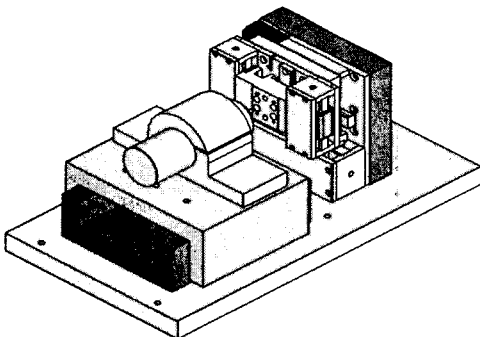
Schematic diagram of first prototype of micro milling machine.
